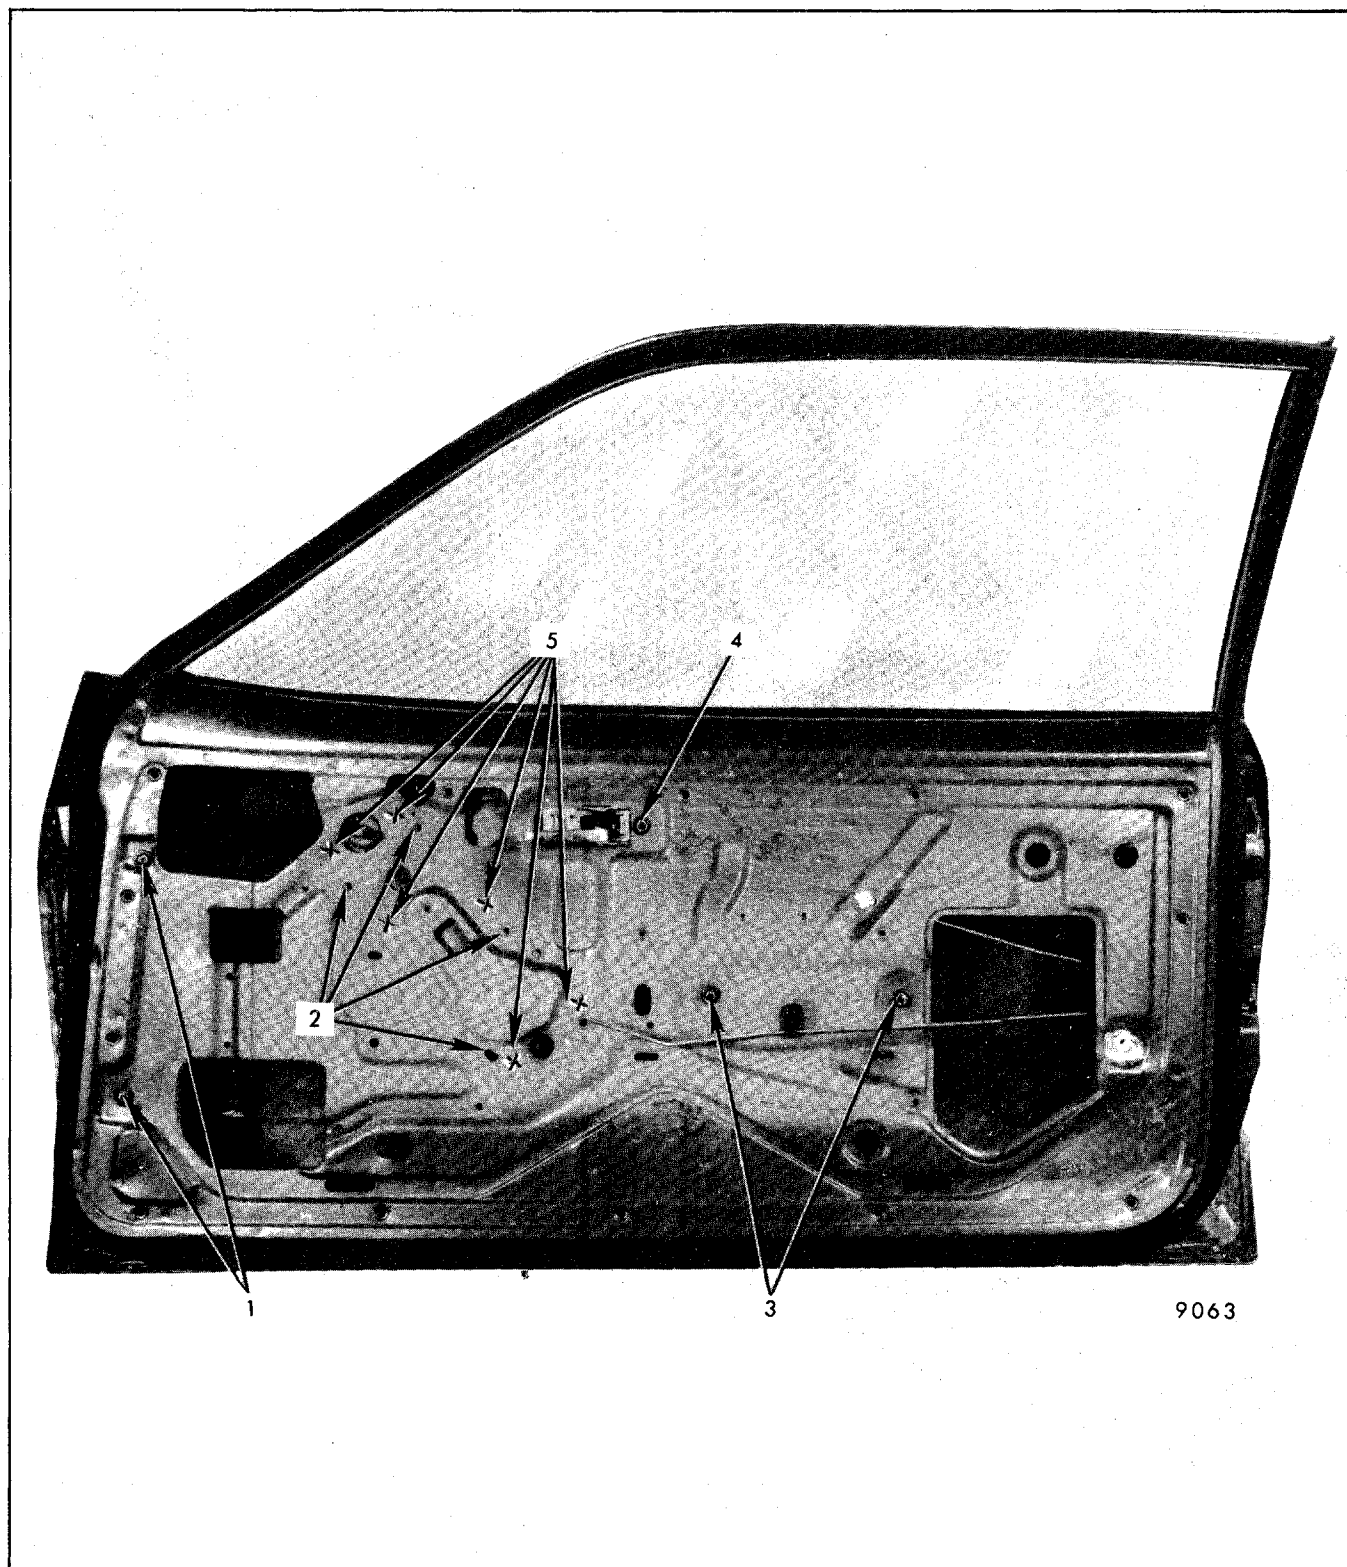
Door Hardware Attachments - "H-27" Style
